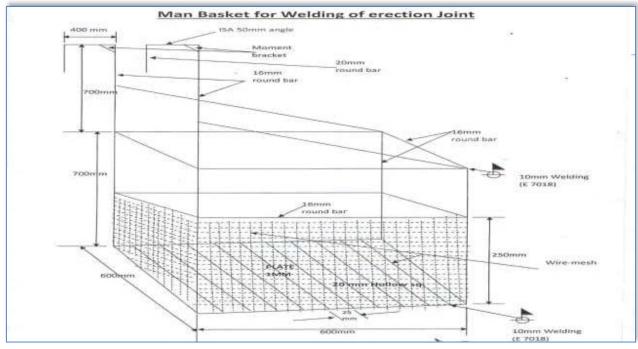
Man Basket for Welding Erection Joint
